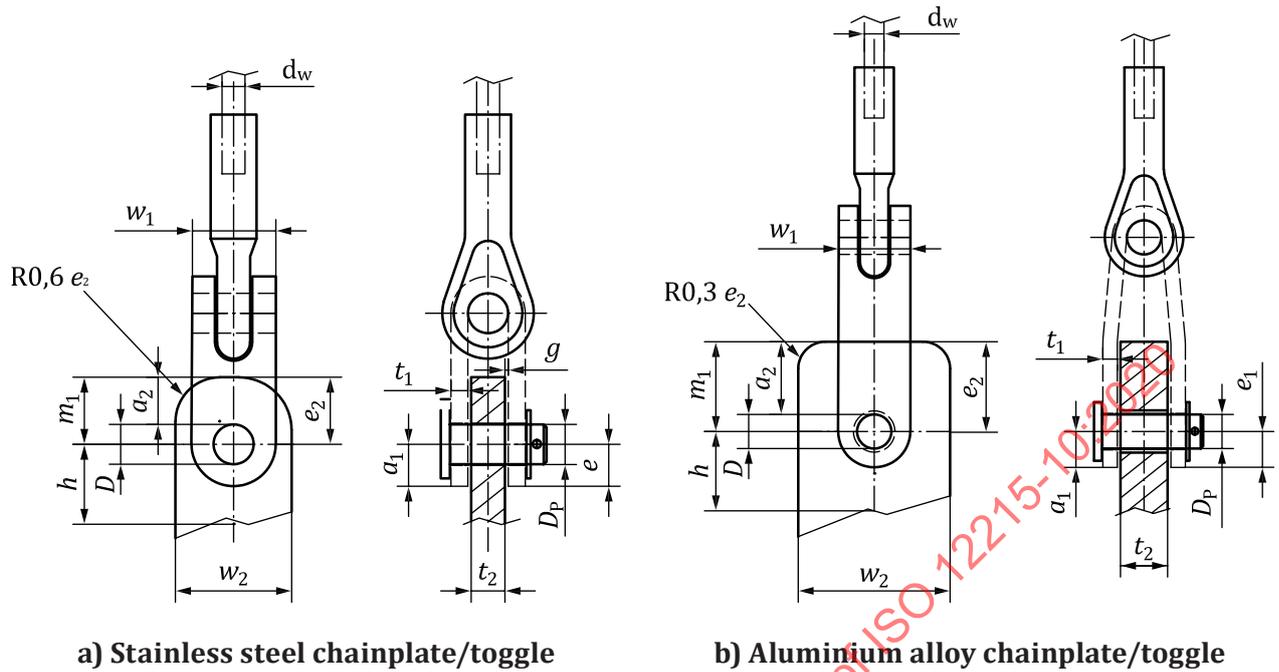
Metal chainplate dimensions in [Tables D.4](#) and [D.5](#)
